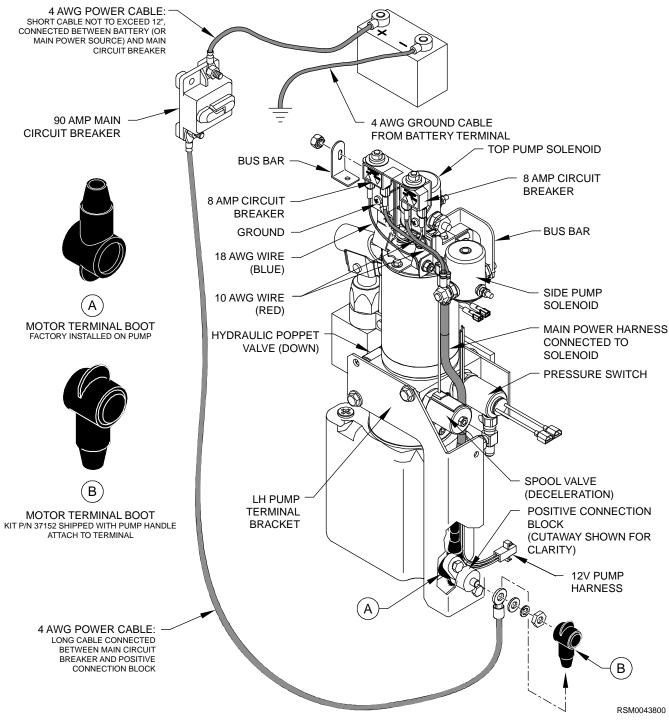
ELECTRICAL INSTALLATION DIAGRAM
